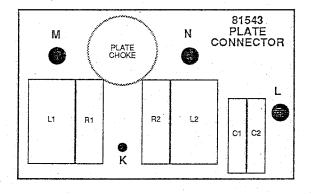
81543 PLATE CONNECTOR BOARD COMPONENT LAYOUT
